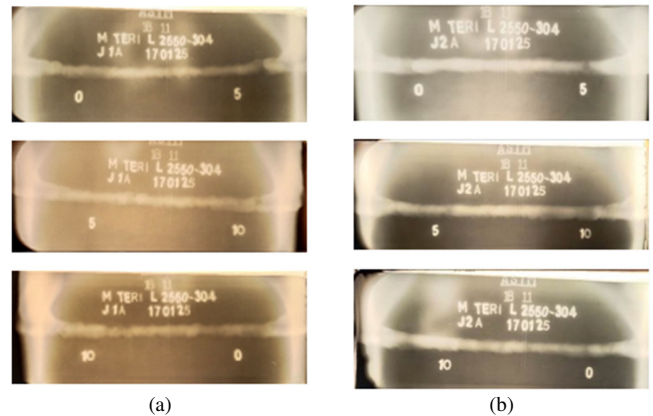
Radiographic image of the duplex S32550-TP304 weld joint test results: (a) joint J1A (filler-309), (b) joint J2A (filler-2594).
